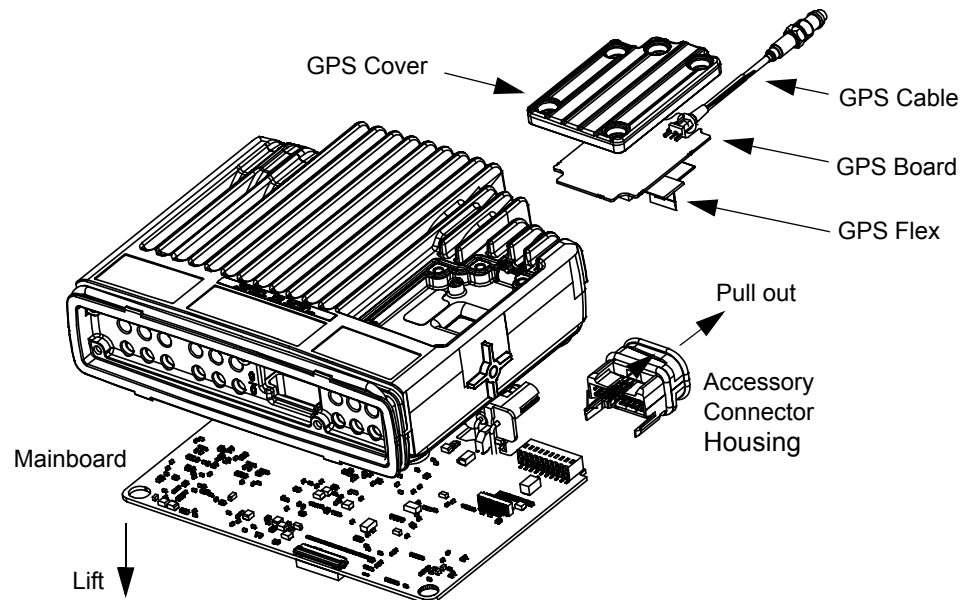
GPS and Mainboard Removal (view from bottom side)
